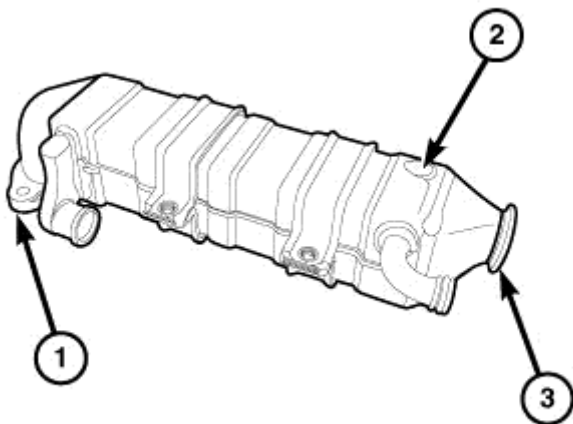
EGR Cooler Inlet Flange Nuts
